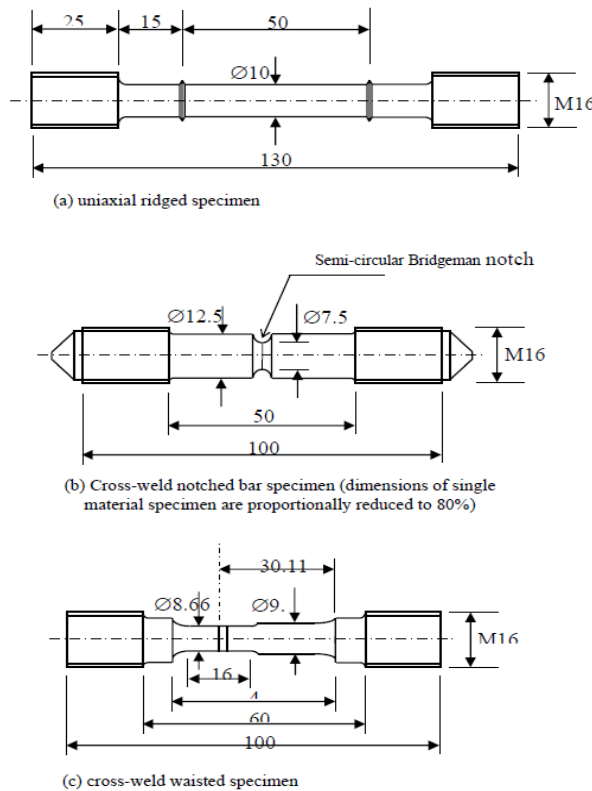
Dimensions of standardised cross-weld specimens - a) uniaxial, b) cross-weld notched and c) cross-weld waisted specimens (all dimensions in mm).¹⁰
